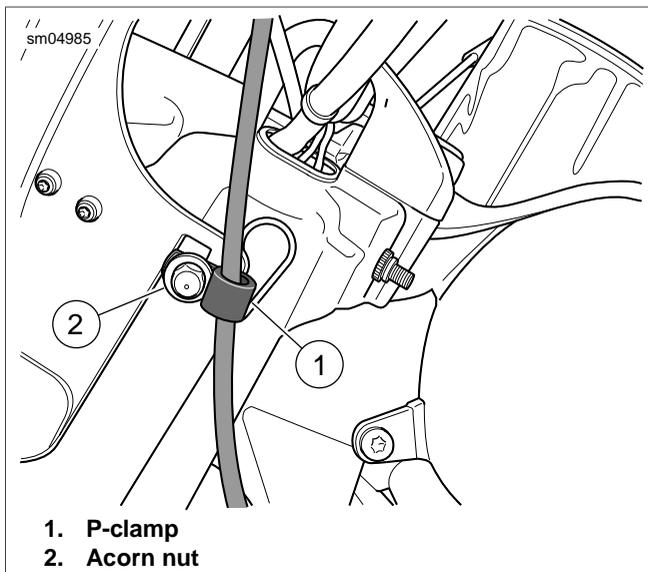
FLHR/C Clutch Cable Routing (Left Side View)
